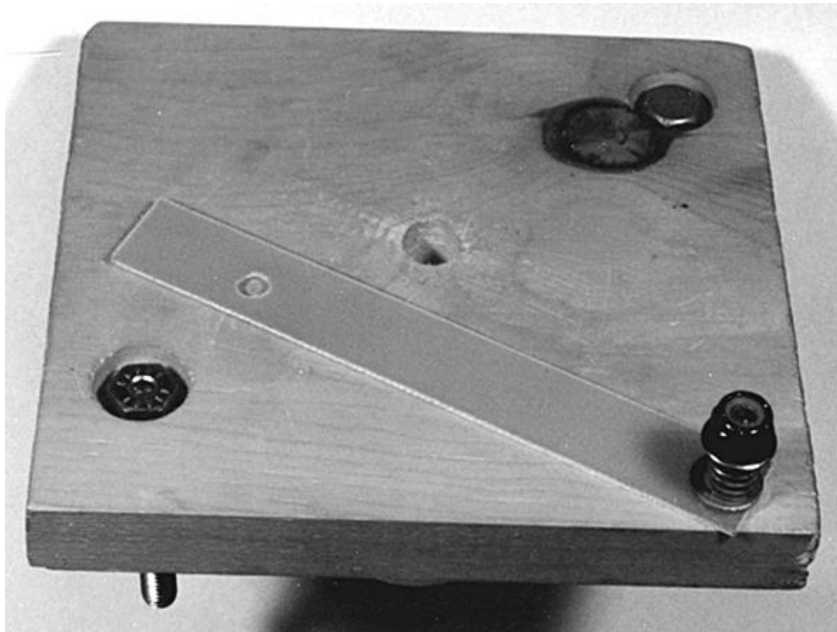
This home-built drill fence makes it easy to drill PC-board holes in straight rows.
